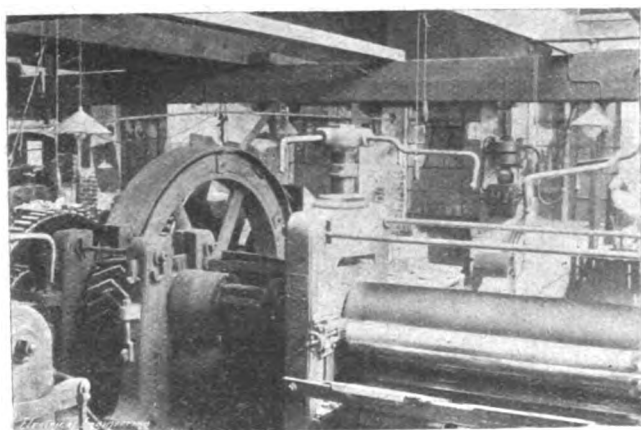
WHITE METAL MILL SHOWING RECONSTRUCTED FLYWHEEL DRIVEN FROM BELOW.
